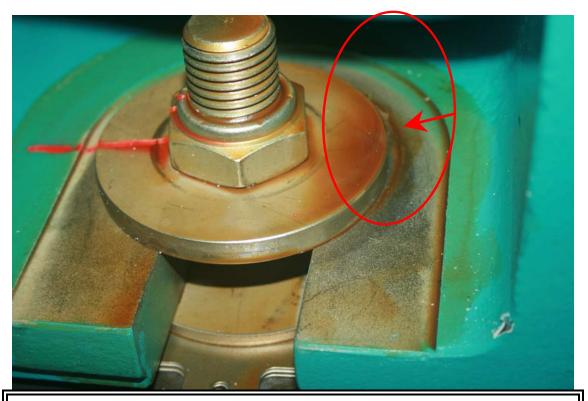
Left rear generator mount. Elastomeric insert bolting moved.
